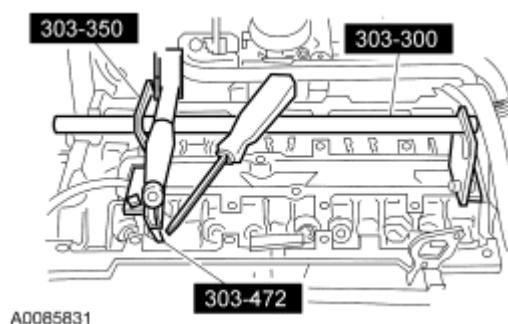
Identifying Special Tools (303-300, 303-350, 303-472)
